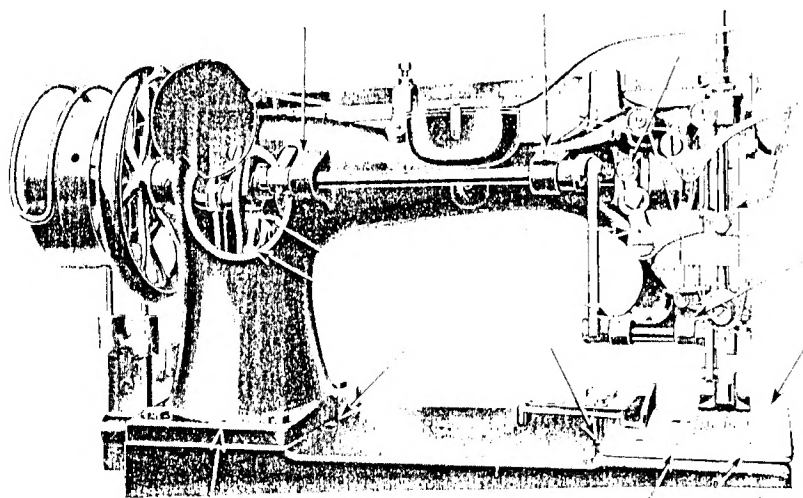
Oiling Points at Rear Side (All Class 7, Two-Needle Machines Except Machine 7-57)
